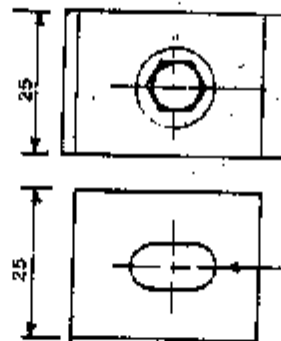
DETAILS OF DEAD-END CLAMP & EYE HOOKS
